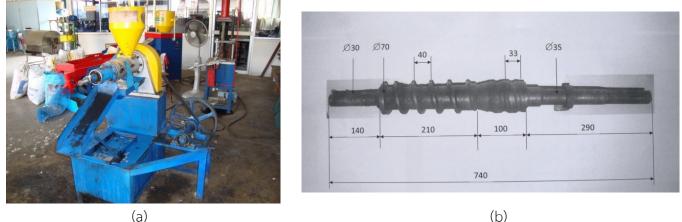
Squeezing machine in tested; (a) jatropha squeezing machine, (b) designed of shaft screw
